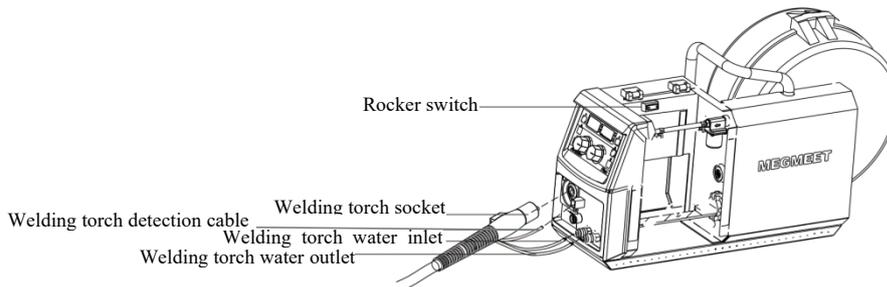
Connection diagram of welding torch of the closed manual wire-feeder
